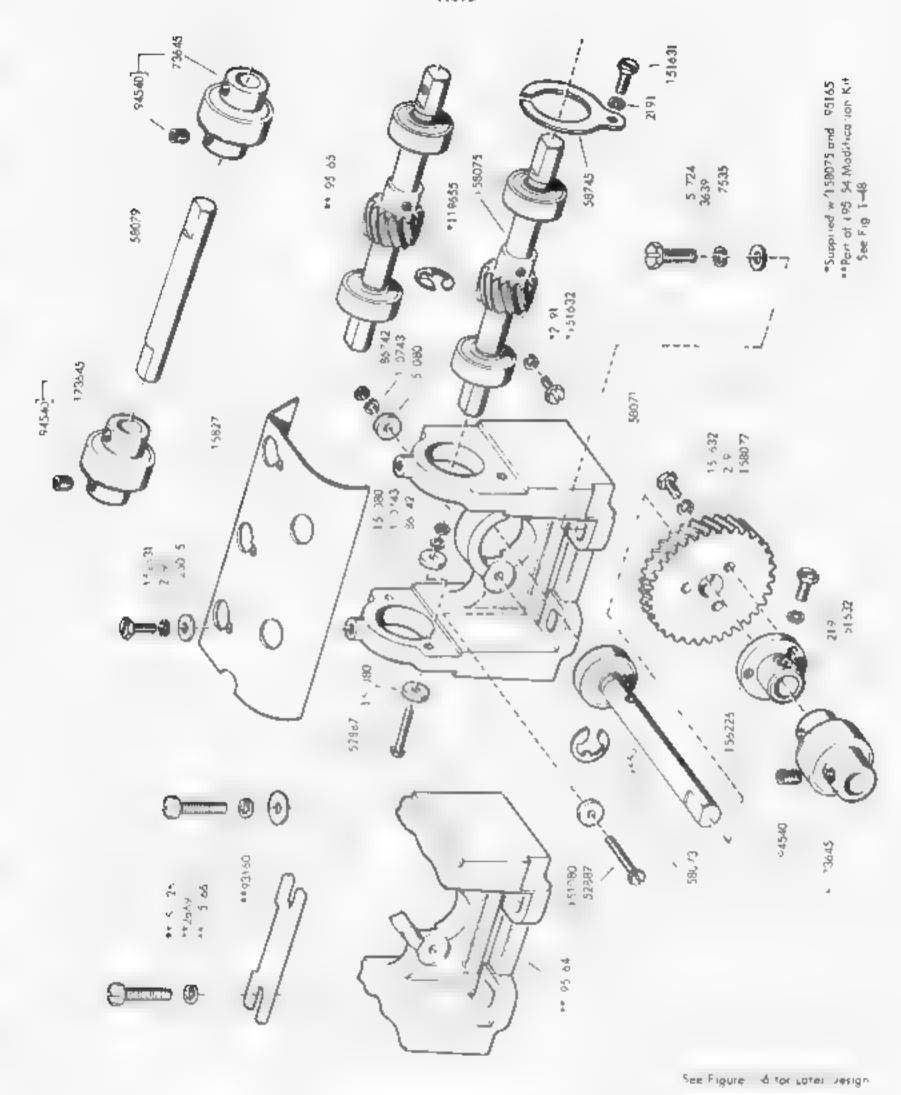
BEARING BRACKET MECHANISM (EARLY DESIGN)
